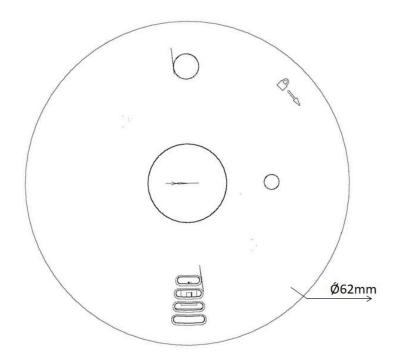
LDSBus Multi Sensor Dimension – Top View
